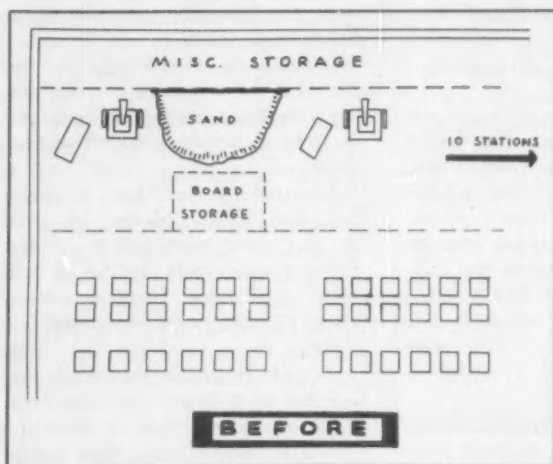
Typical arrangement of non-mechanized squeezer floor shows inefficient use of space.
